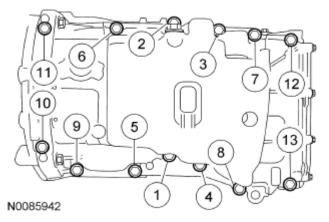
Identifying Oil Pan Bolts Tightening Sequence
